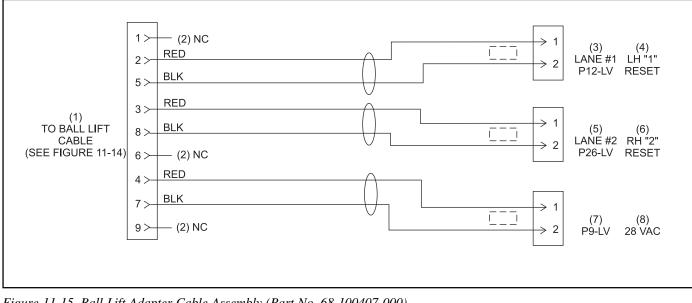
Ball Lift Adapter Cable Assembly (Part No. 68-100407-000)
